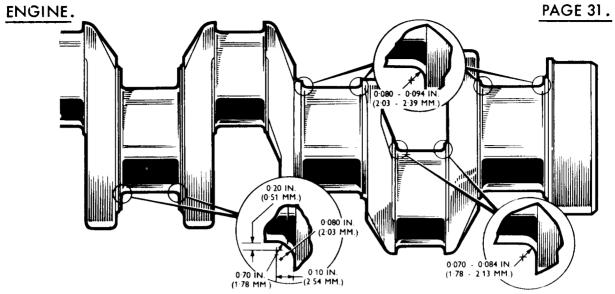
CRANKSHAFT FILLET RADII - REGRINDING
